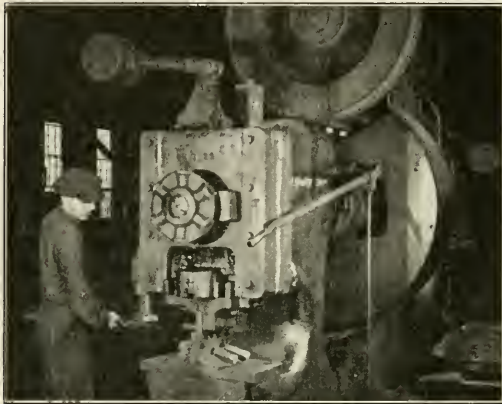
Bar Shears Reclaimed by Welding. The Head Was Broken Off and Machine Scrapped. Saving by Welding \$2,000
